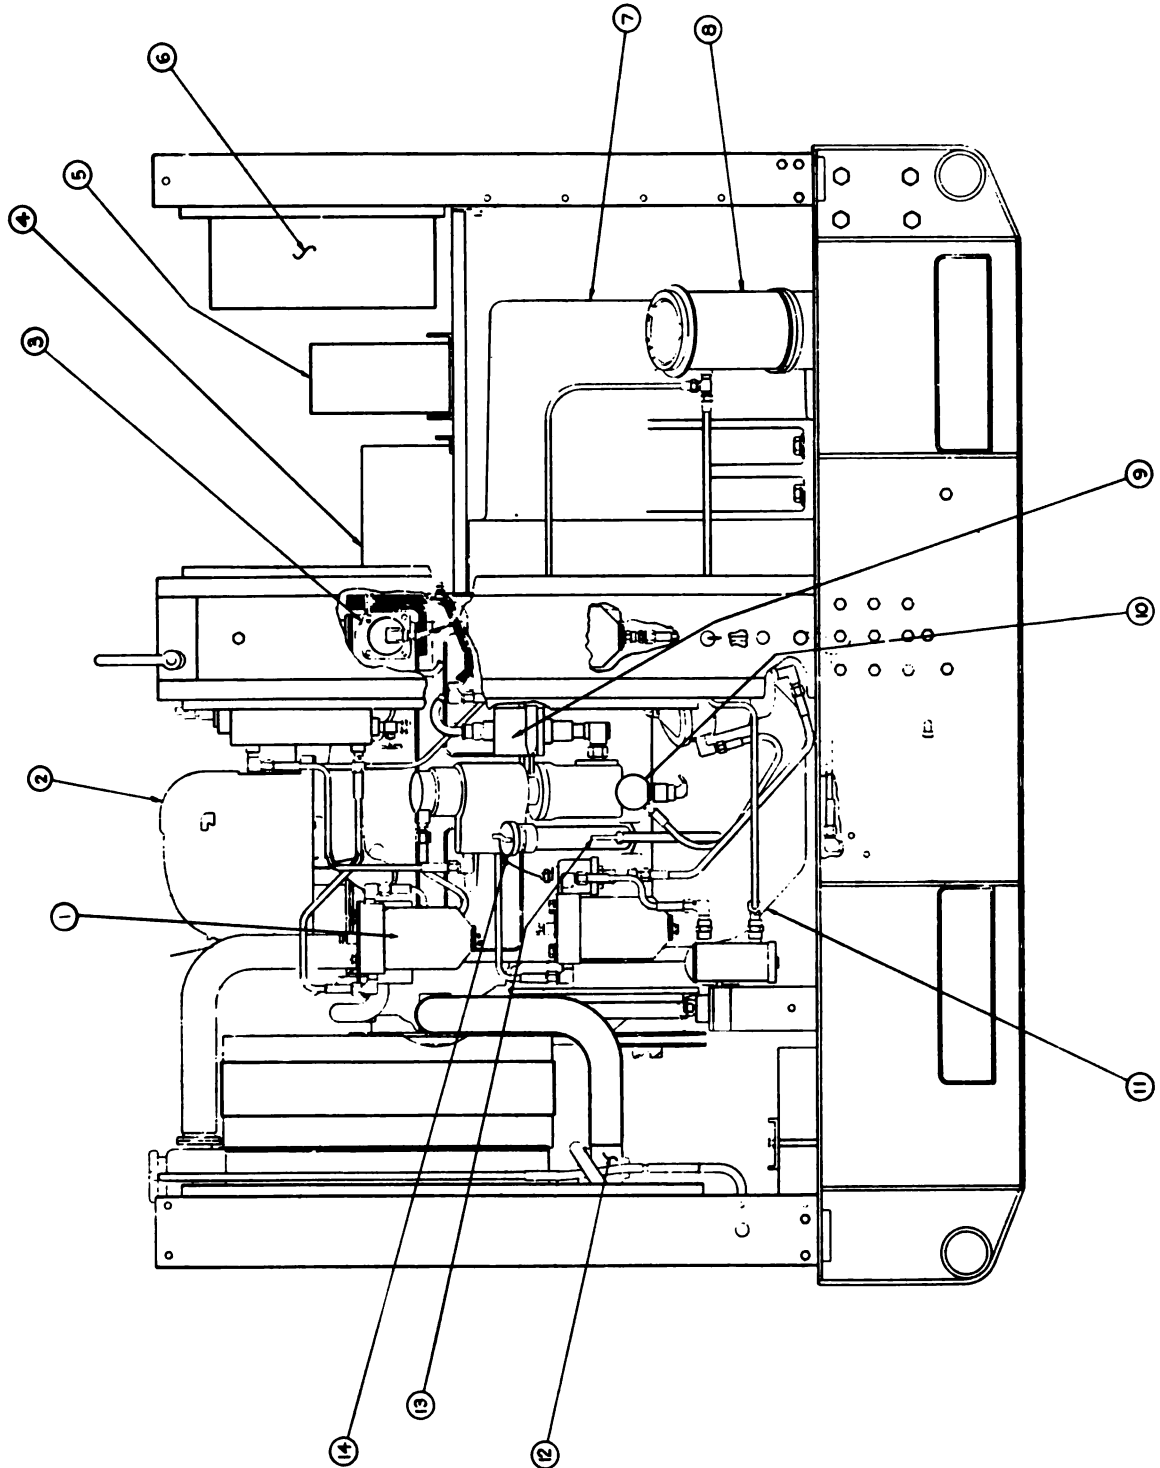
Hol-Gar model SP-HF-15 motor generator set, wheel-mounted.
